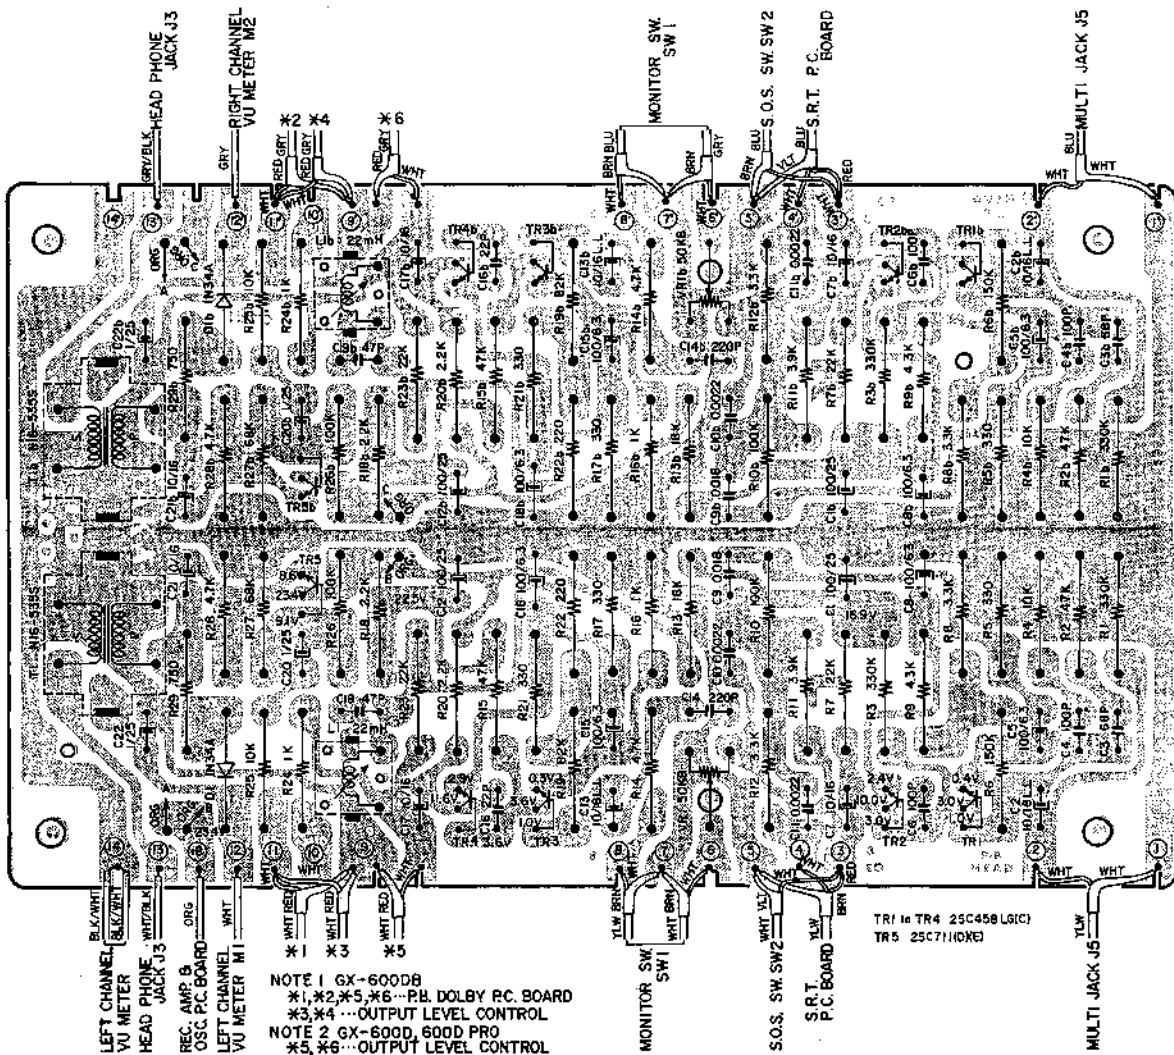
PB. AMP. P.C. BOARD TD-5004 (Reverse Side)
